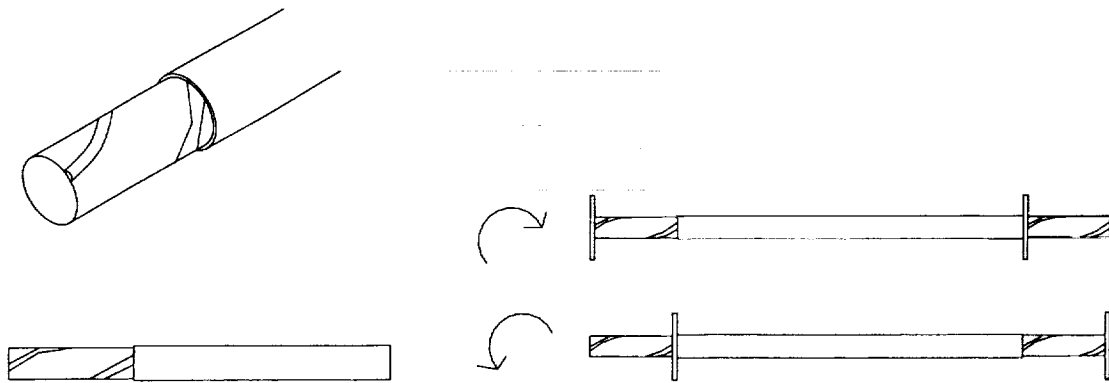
Illustration of Spline Gear Design to Serve as a Clutch Mechanism
